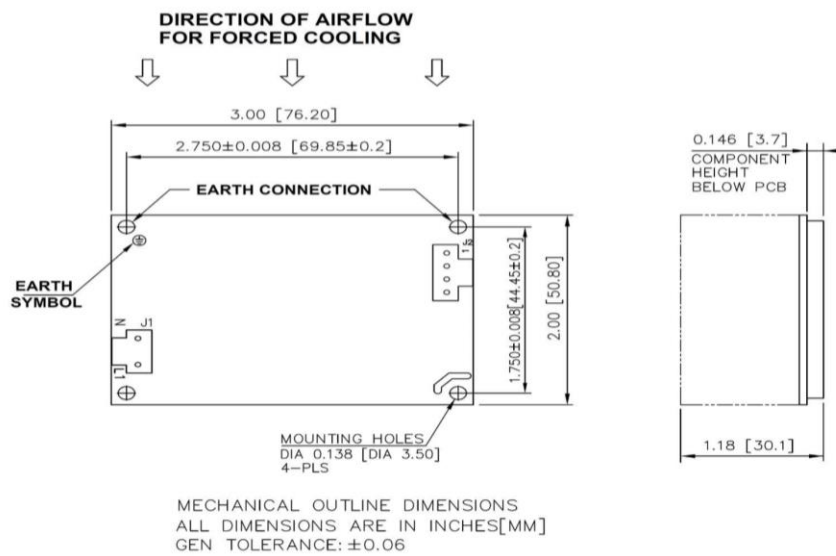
Mechanical Drawing - Molex Header (Option 2)
